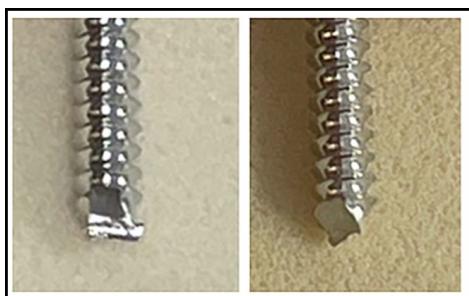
Two views of a stainless-steel cut screw showing mechanical deformation of the screw tip.
